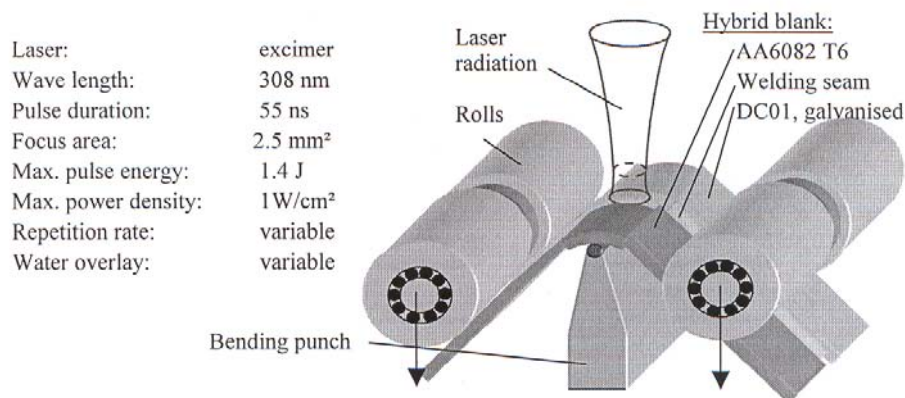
Principle of bending with laser induces shock waves of hybrid blanks
